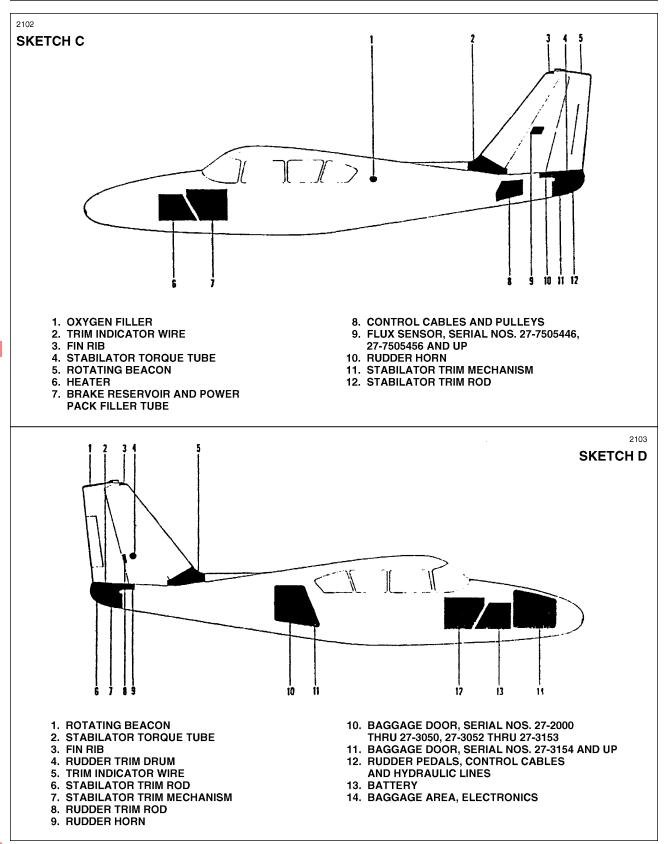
Access Plates and Panels PA-23-250 (six place) (Sheet 4 of 5)
